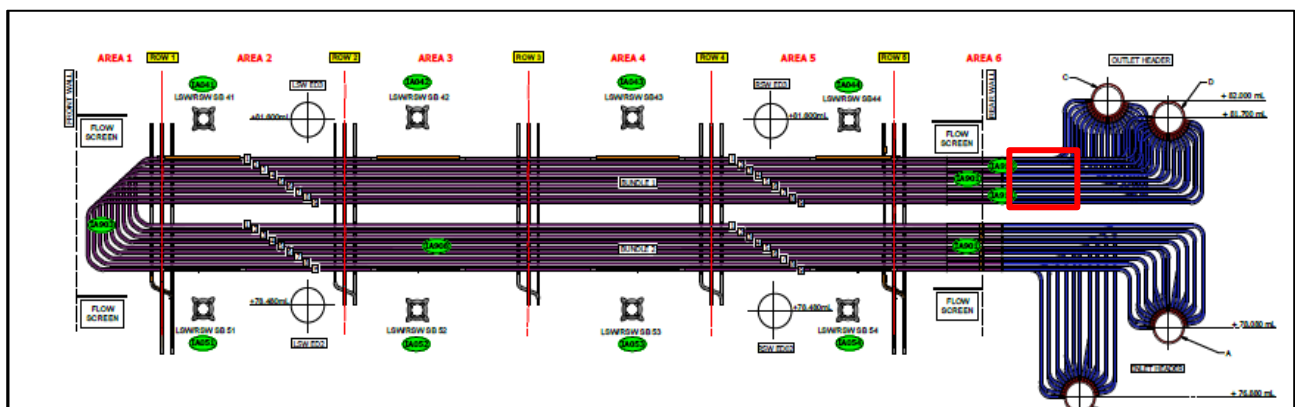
Schematic drawing of RH2 showing where Tube-SOLO inspected should be conducted.
